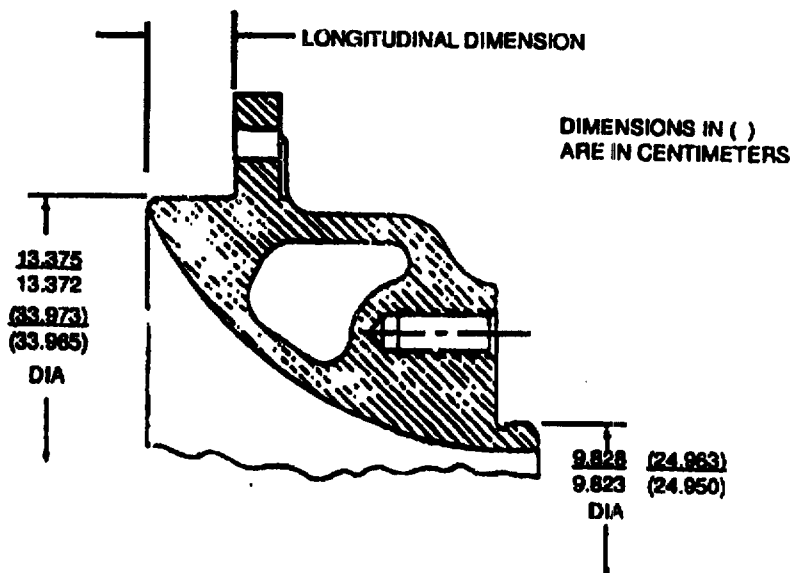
Centrifugal Impeller Housing - Repair Area.
